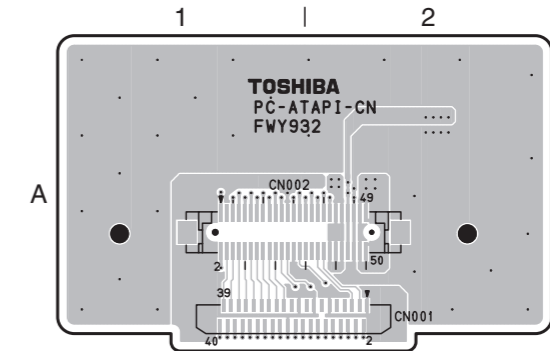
ATAPI PC Board (Bottom side)
